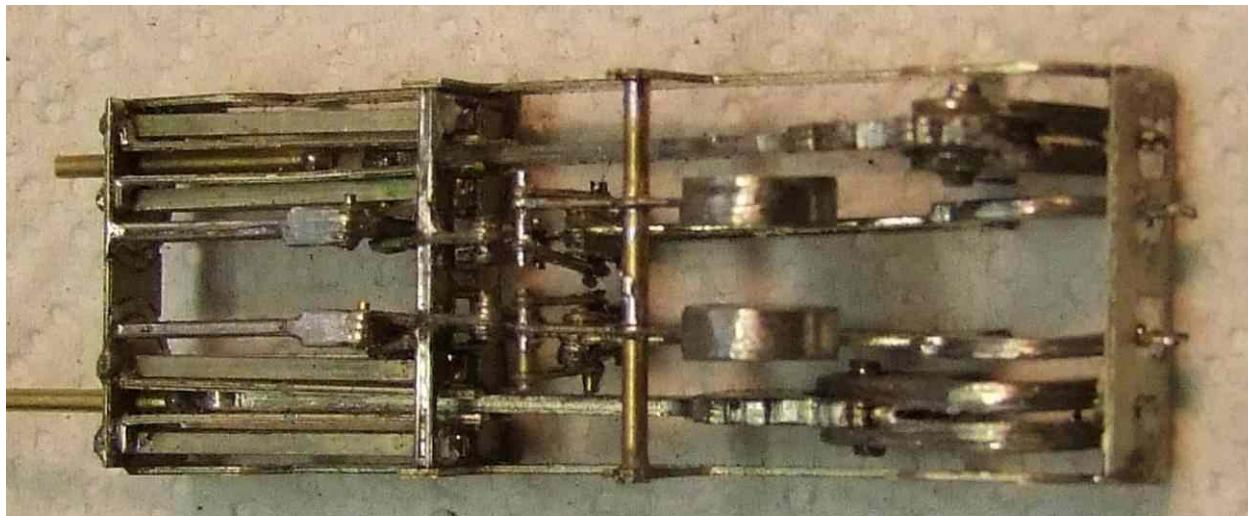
Walschaerts' Valve Gear for Piston Valve Cylinders
